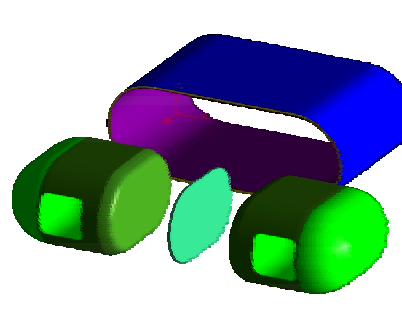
Final assembly of the CBAT skirt sandwich structure. The skirt is composed of inner and outer graphite/epoxy skins bonded to a honeycomb core.
